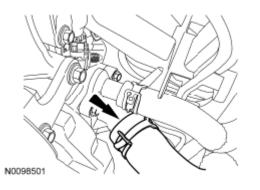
Locating Lower Radiator Hose Courtesy of FORD MOTOR CO.
